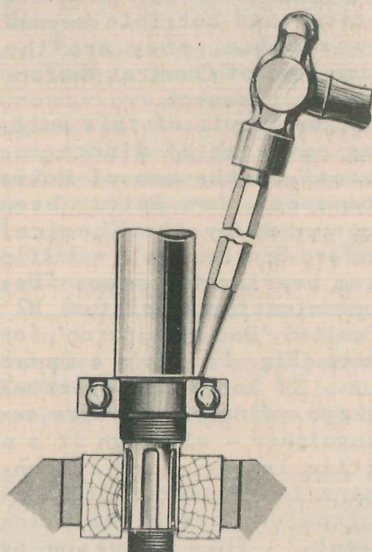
In pressing a bearing off a shaft, apply the drift to the seated ring.
